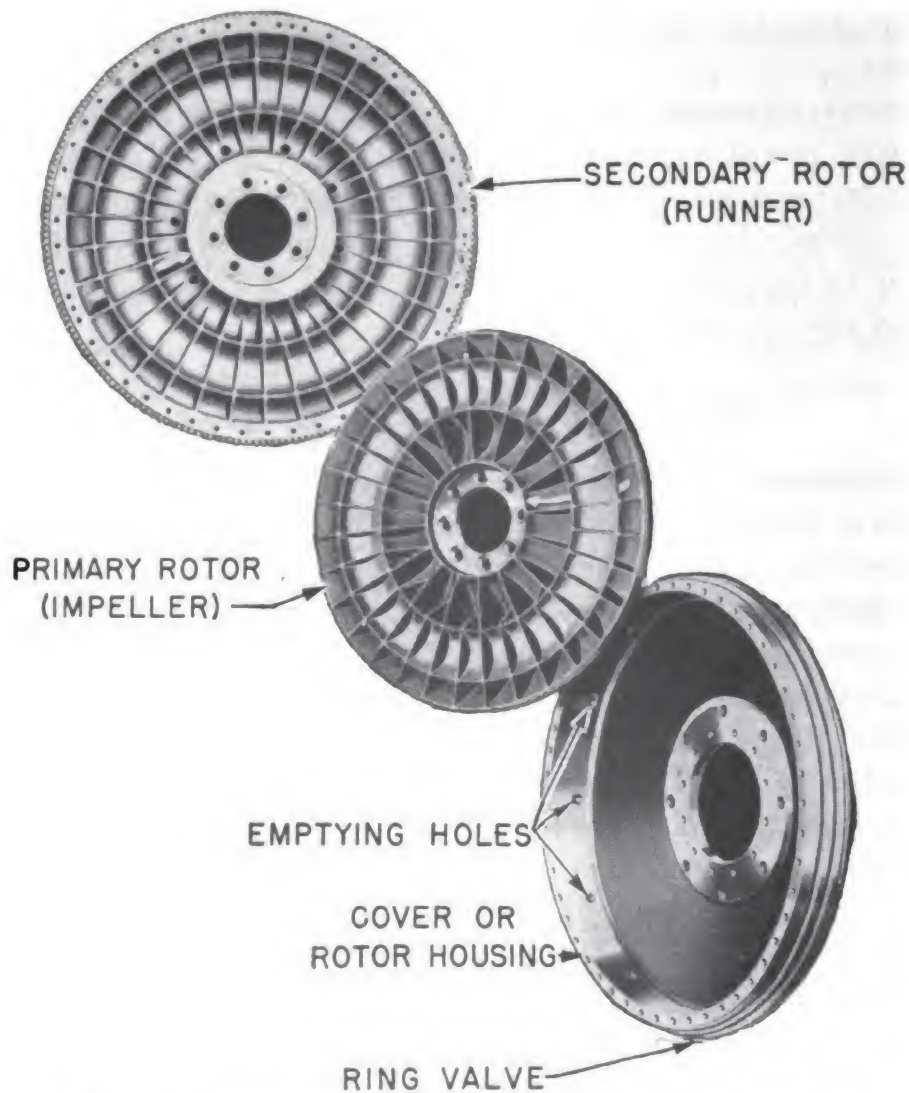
Runner, impeller, and cover of hydraulic coupling.
